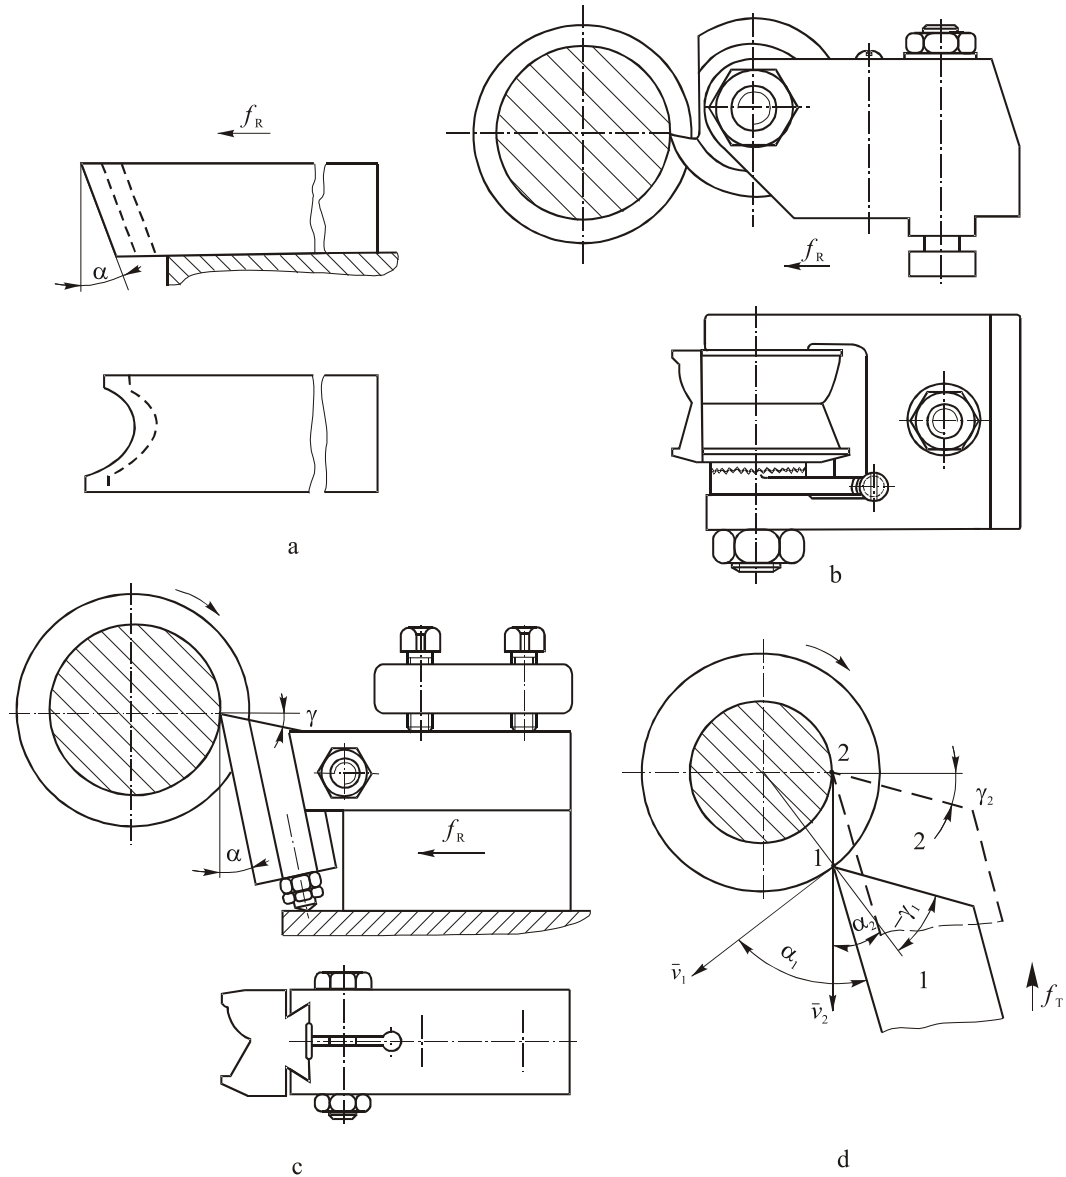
Form cutters: (a) radial; (b) circular; (c) prismatic; (d) tangential prismatic
